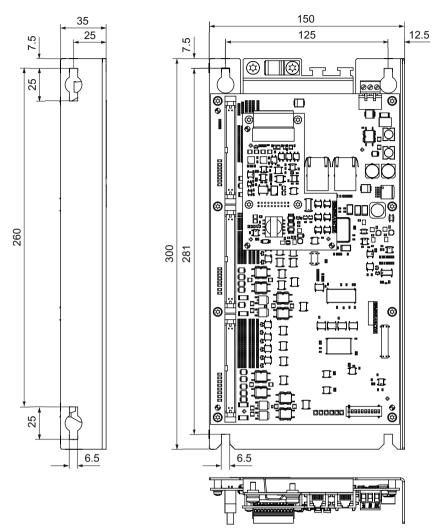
PP 72/48D 2/2A PN dimension drawing
